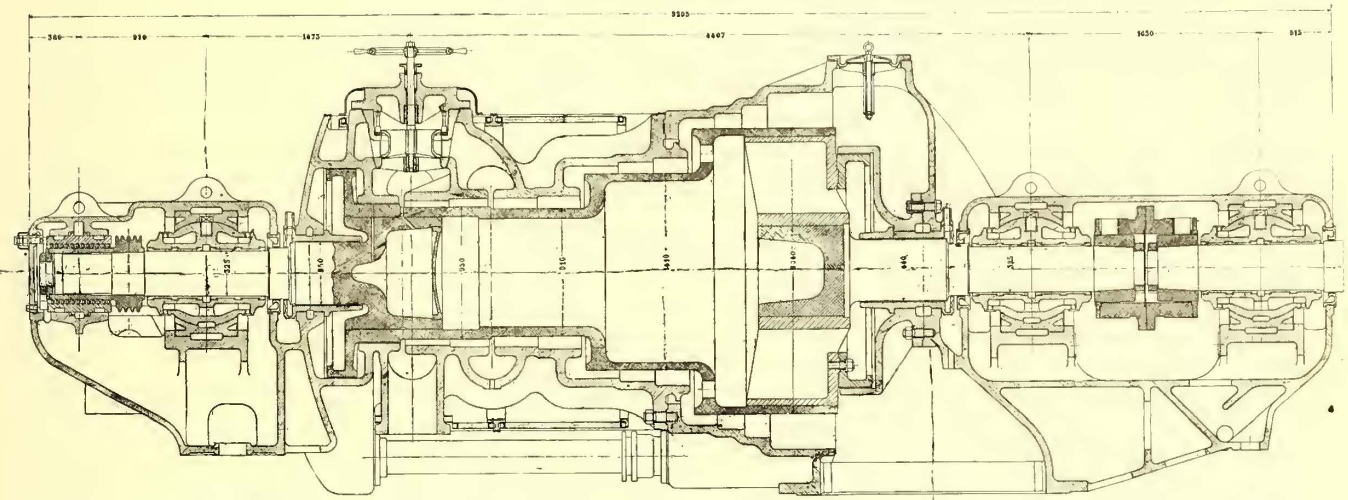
Cross-section of 12,000-hp Steam Turbine for Buenos Ayres. (Dimensions are given in millimeters.)
